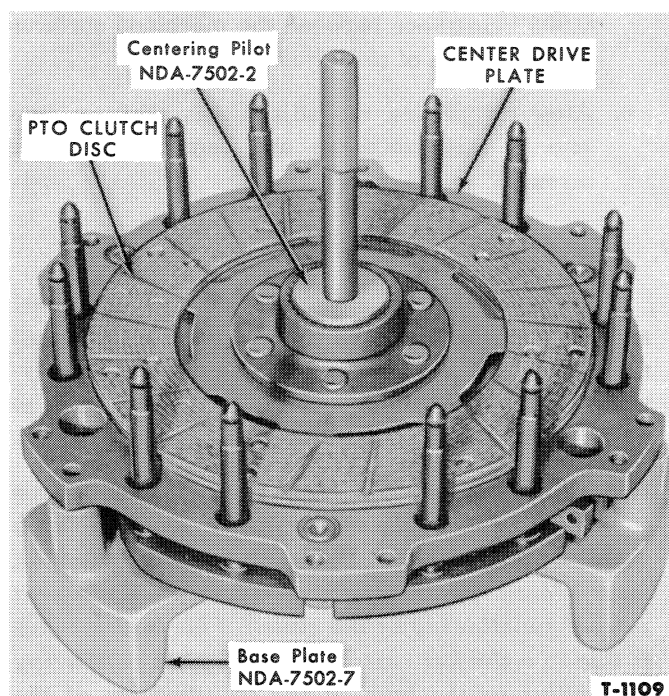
Center Drive Plate and P.T.O. Disc Installed
